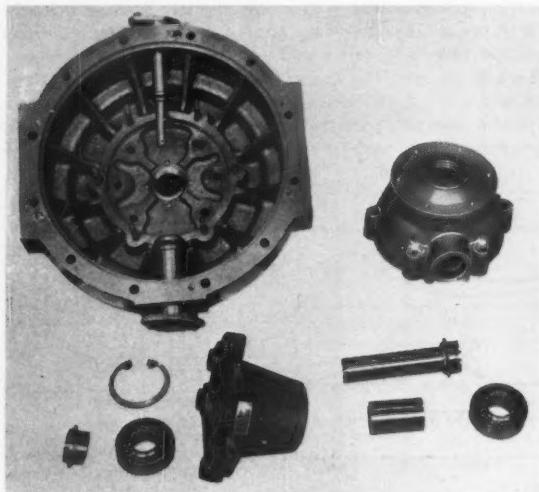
For experimental purposes, there are two flats on the nut that is tightened against the compressor rotor to hold the rotating assembly together. One is to reflect a light ray on to an electronic counter, while the other is simply to maintain the balance. The whole of the nut, except the reflecting flat, is painted black. The shaft is ground to a tolerance of 0.0002 in to avoid straining the inner races of the supercharger grade, that is, specially selected ball bearings
